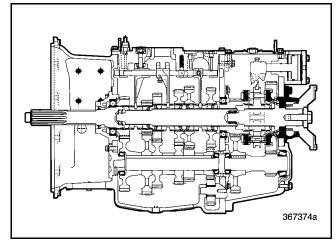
Rear Mainshaft Bearing Cover Component Locator
